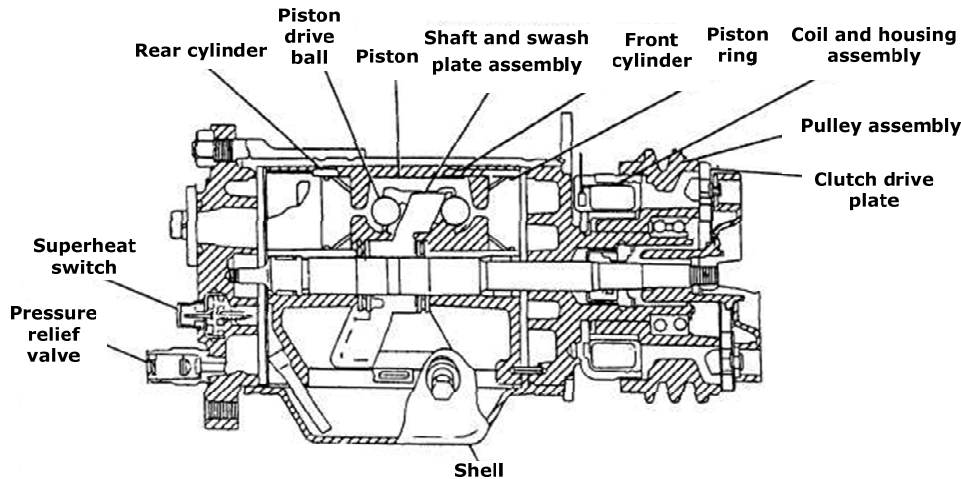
Through view for a six-cylinder axial type compressor [1.14]
